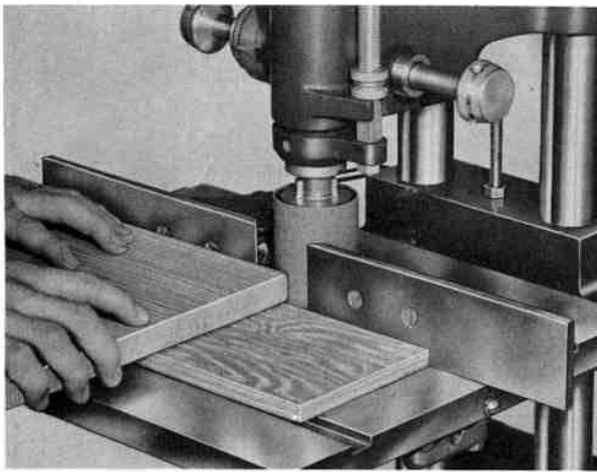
Drum Sander in use with Shaper Fence attachment. (Board rest for workpiece is necessary, as shown)
